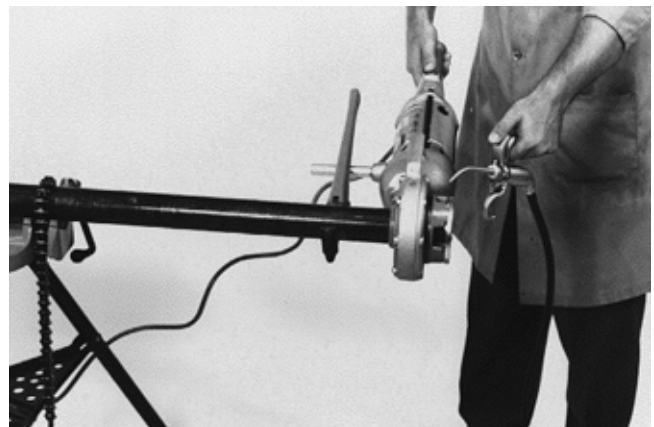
Threading Using Pipe Wrenches as Support Arm
